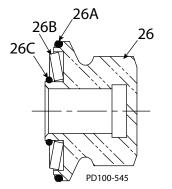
Cross-Section View of Rotor Nut Assembly, as Assembled
